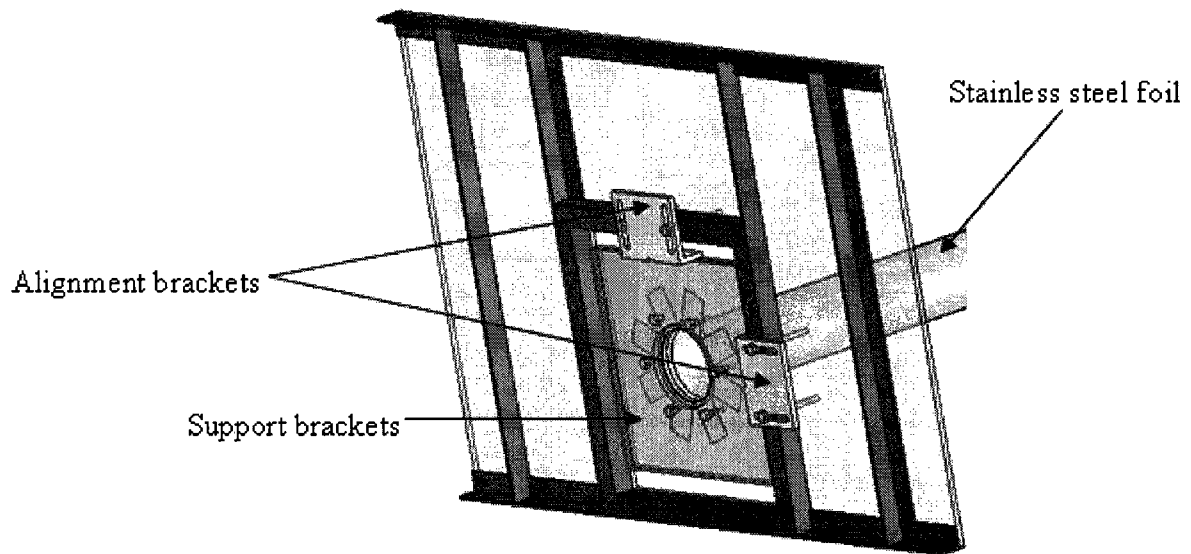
View of the underside of the bottom support frame, showing the alignment brackets and a stripped version of the outer cylinder with only the stainless steel foil and support brackets showing
